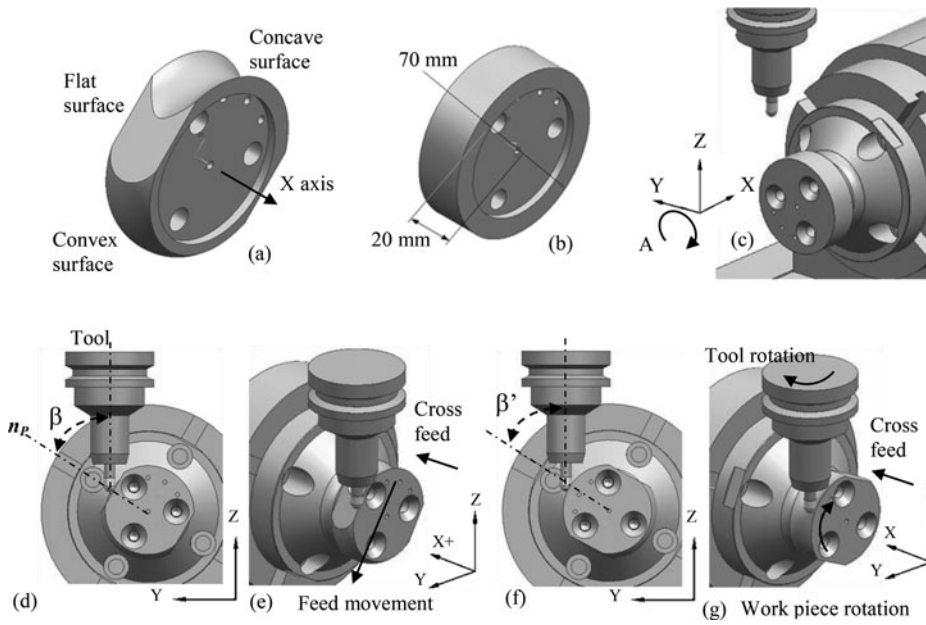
Test workpiece (a). Dimensions of raw material (b). Setup on fourth axis machine (c). Setup for the finishing process for the flat surfaces (d, e) and concave surface (f, g).
